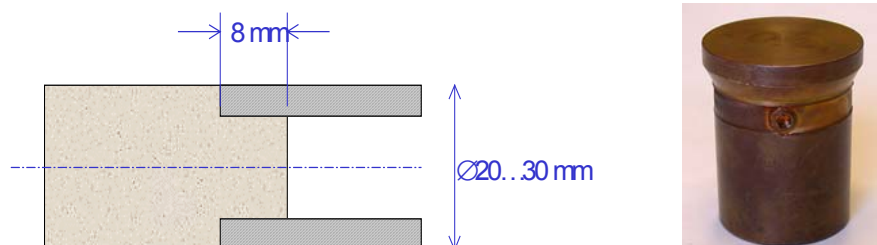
Drawing of the joint configuration for the suspension arm. On the right hand side is a picture showing similar joint geometry used in welding of copper.
